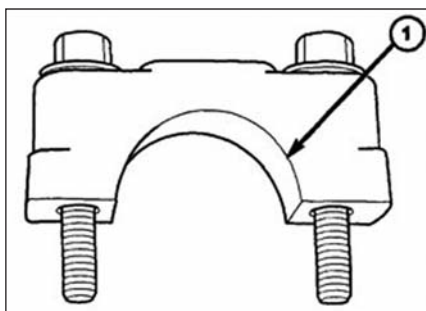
Lightly chamfer bore radius edges on 2.0L, 2.4L engines with a hand file, creating a 45° chamfer along the edge of each bore radius.
